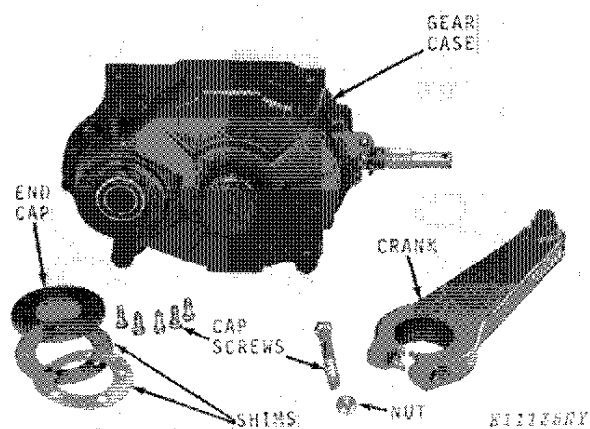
Removing Flywheel Shaft End Cap and Crank
